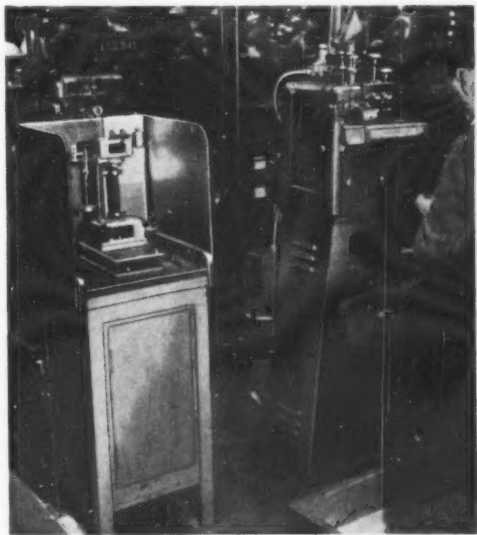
One of the British-built Sleeper & Hartley machines in the spring-making section
